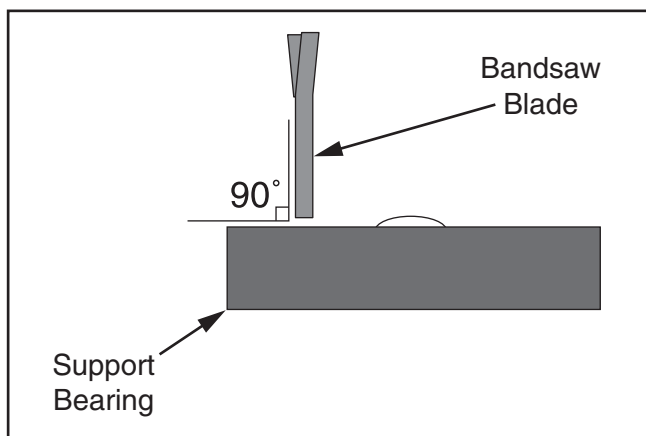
The face of the support bearing must be perpendicular (90°) to the blade.
